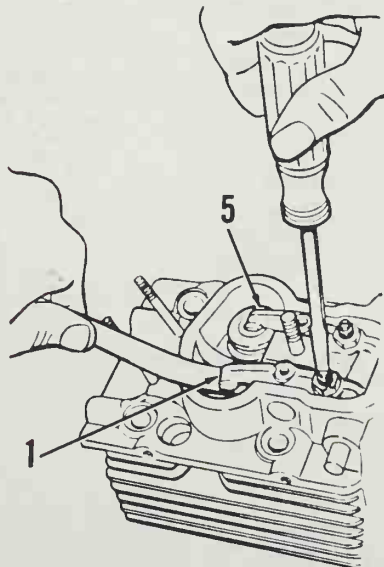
Refer to text for adjustment of exhaust (1) and intake (5) valve tappet gap.
